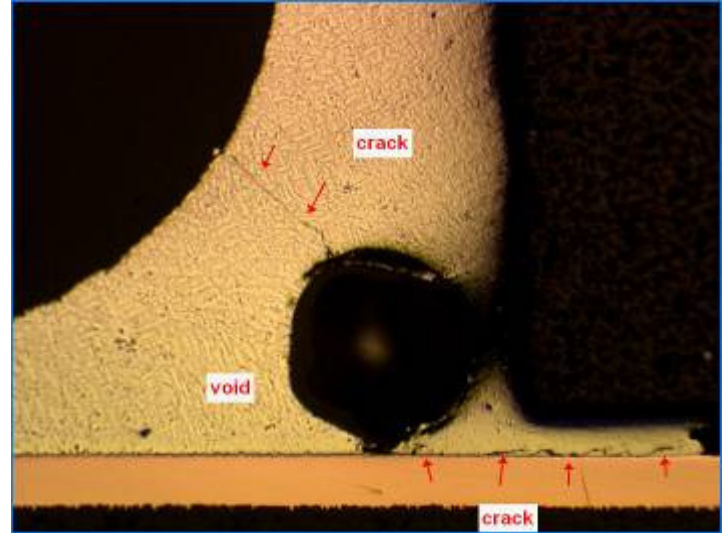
cross section, SN65, U52, left lead solder crack and void, 100x
